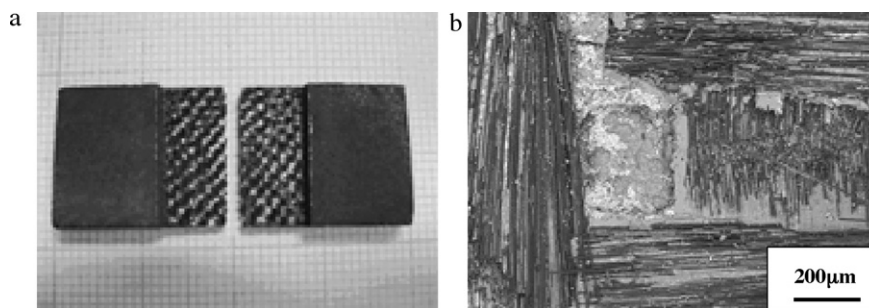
Morphologies of the interlaminar shear fracture of 2D C/SiC–ZrB<sub>2</sub>–TaC: (a) macro photograph; (b) interlaminar shear fracture surface.
